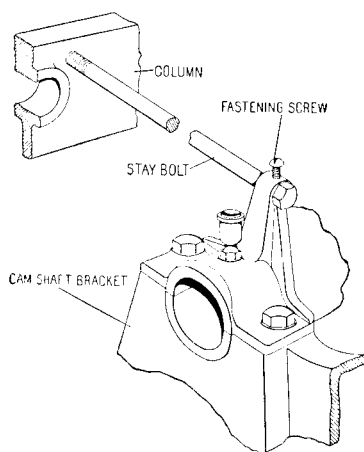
View of stay bolt supporting column against camshaft bracket.
